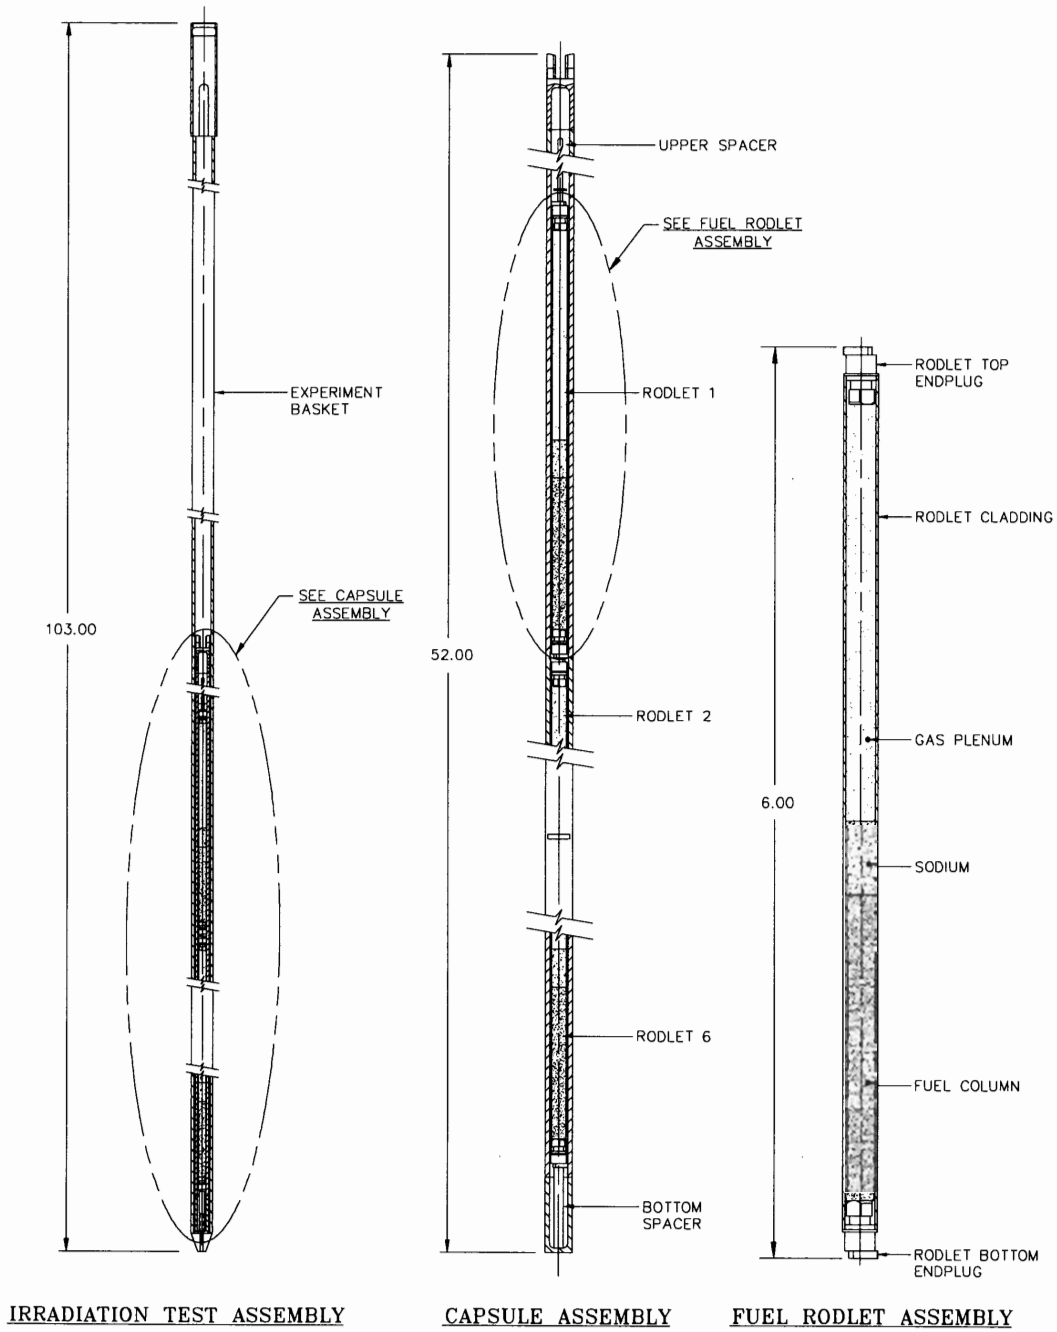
AFC-1 irradiation test, capsule and rodlet assemblies (dimensions in inches)
